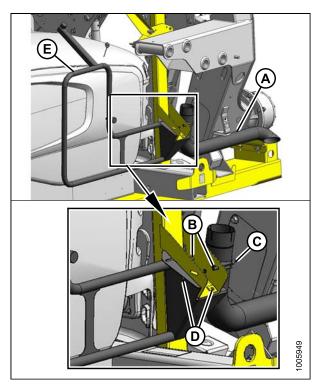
Hand Rails and Exhaust Stack Shipping Position
